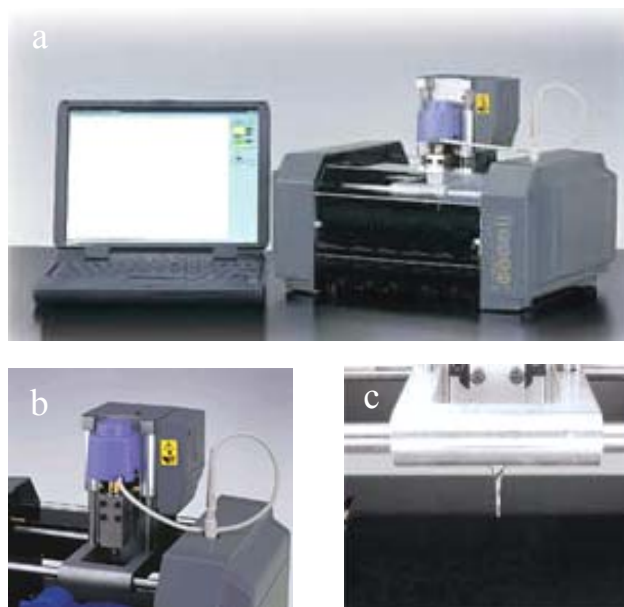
(a) CNC milling machine connected to a computer [100] with the milling head fitted (b) and with the rotative spindle (c) [101].
